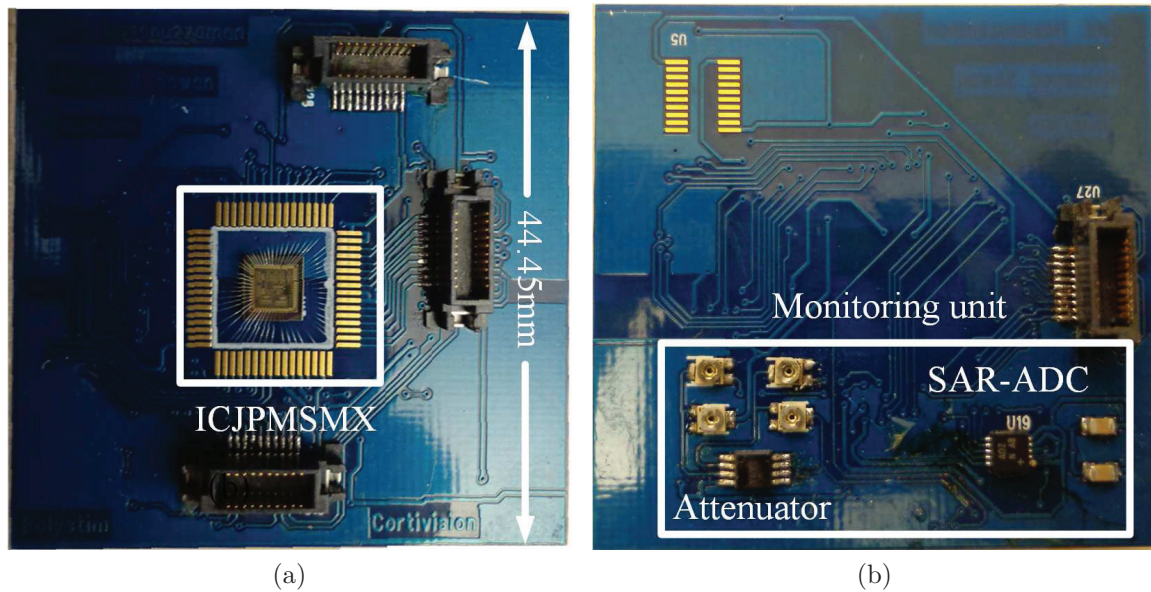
The assembled microstimulator prototype: (a) Wire-bonded MED2 chip die and connector on the top side of PCB2; (b) the monitoring unit (the attenuator and ADC).
